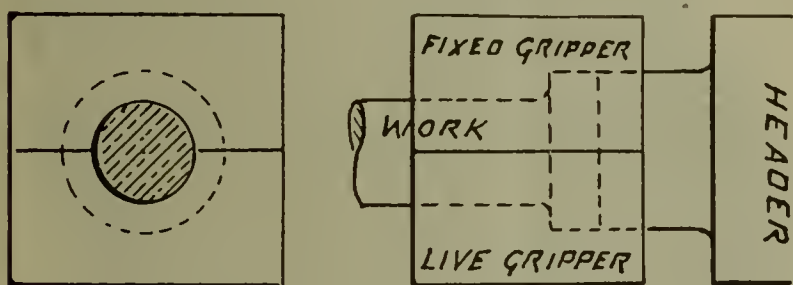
ARRANGEMENT OF GRIPPER AND HEADER.
